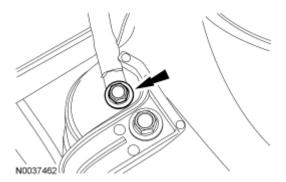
Locating Ground Wire And Bolt Courtesy of FORD MOTOR CO.
